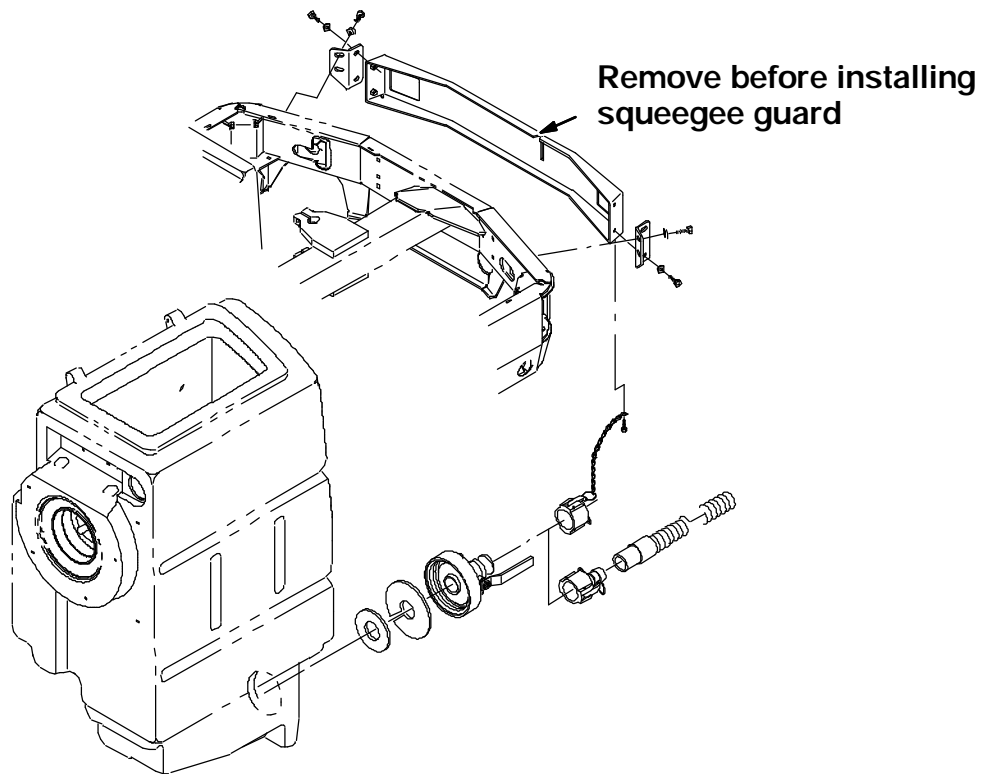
BUMPER REMOVAL ON STANDARD MACHINE
